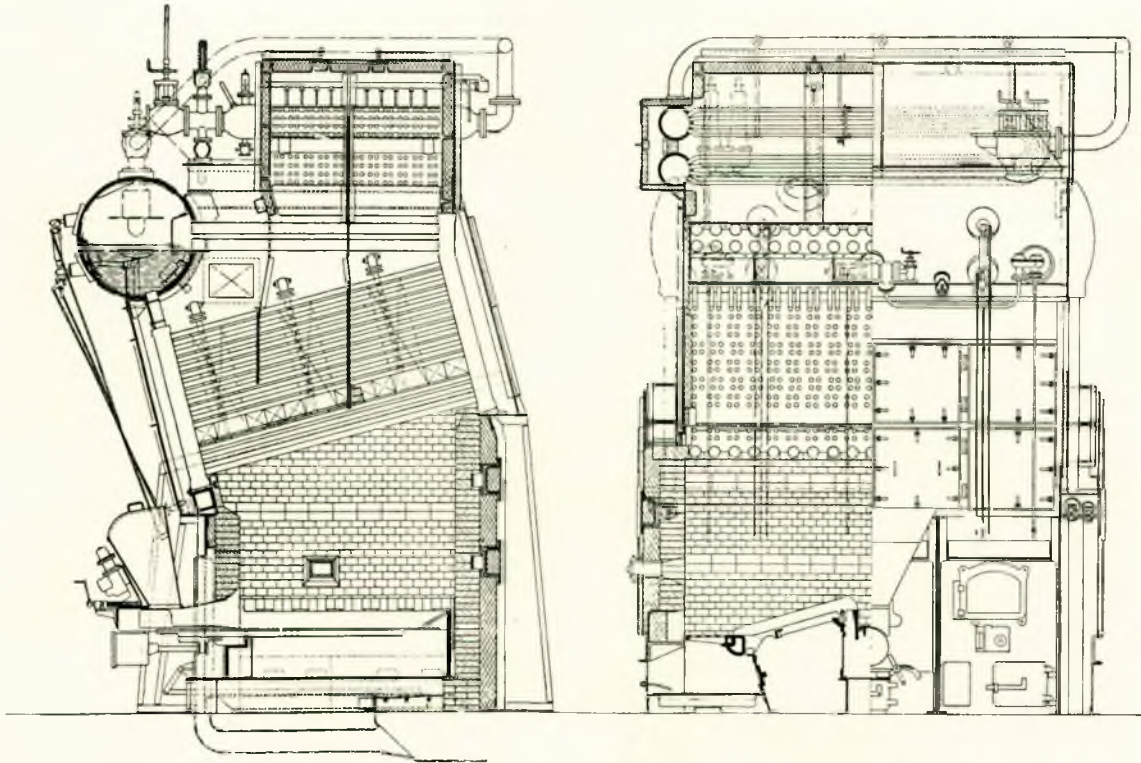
Babcock & Wilcox boiler with overhead superheater.
